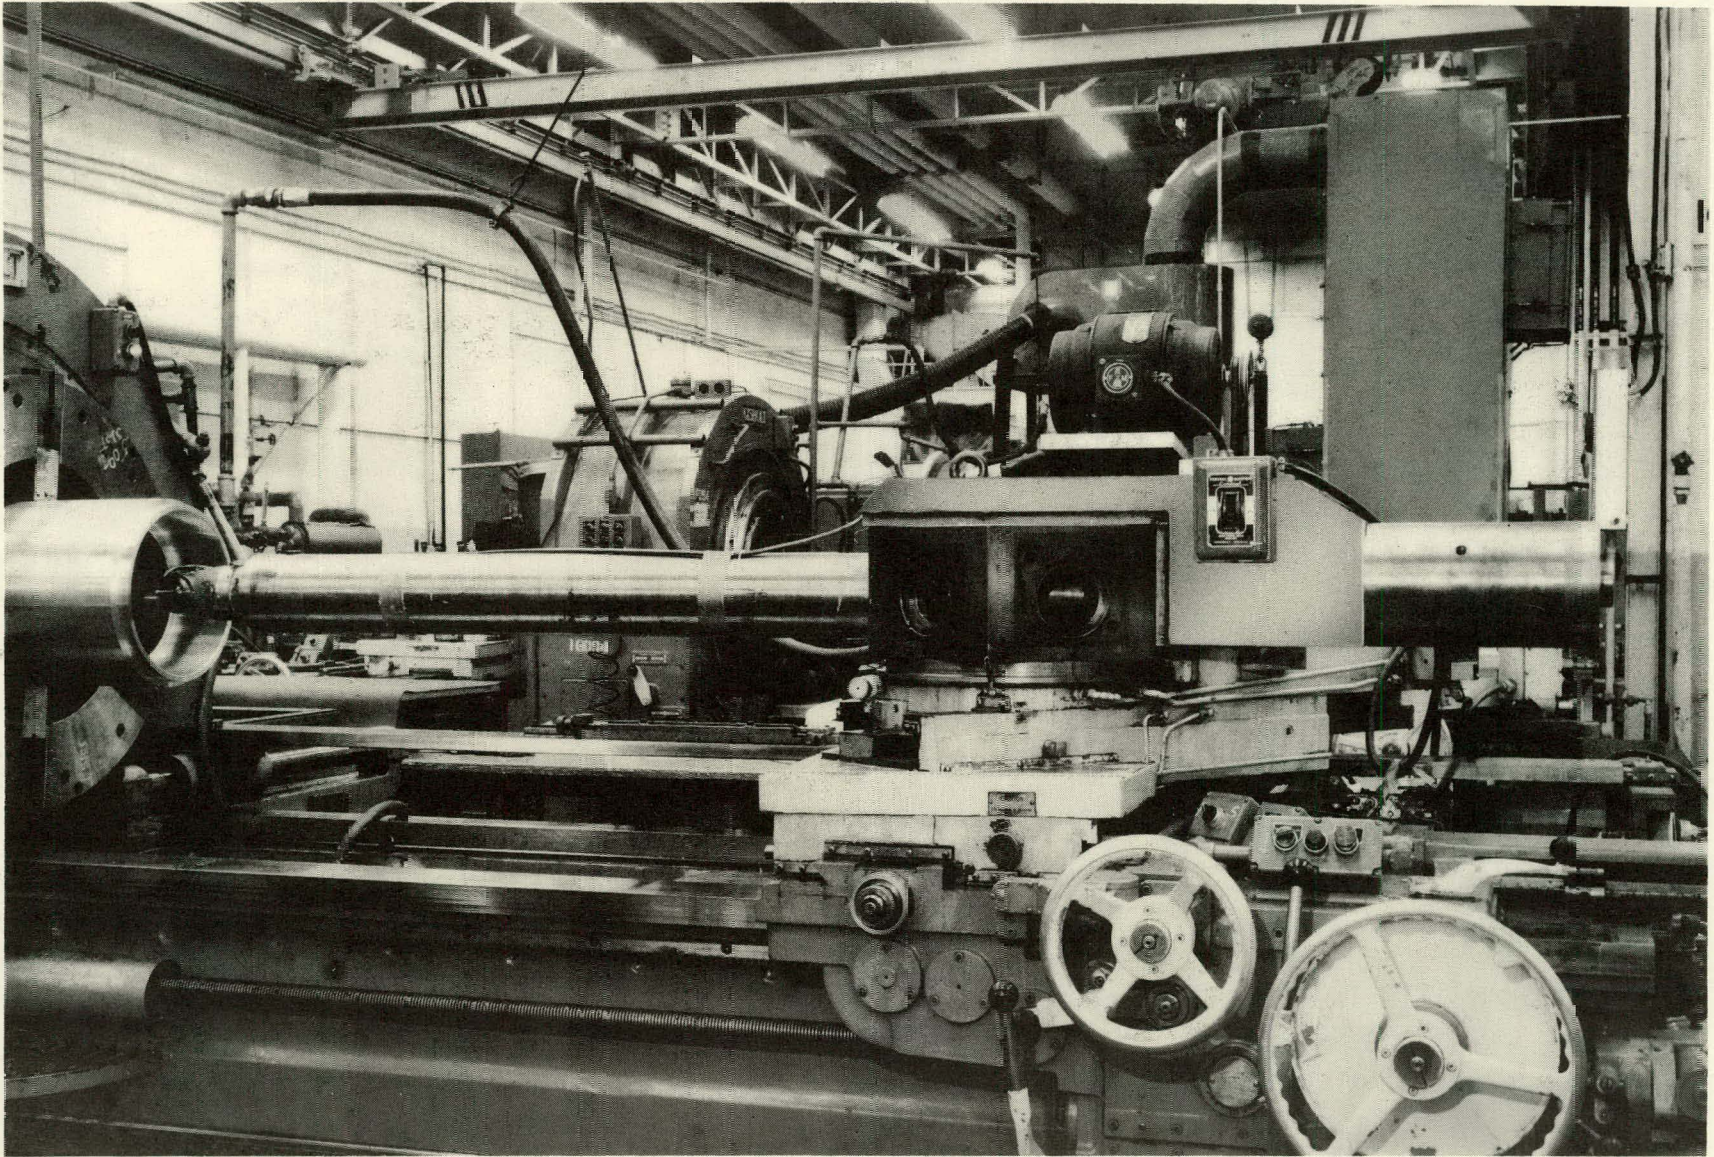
Gisholt Lathe With Special Right-Angle Milling Head
